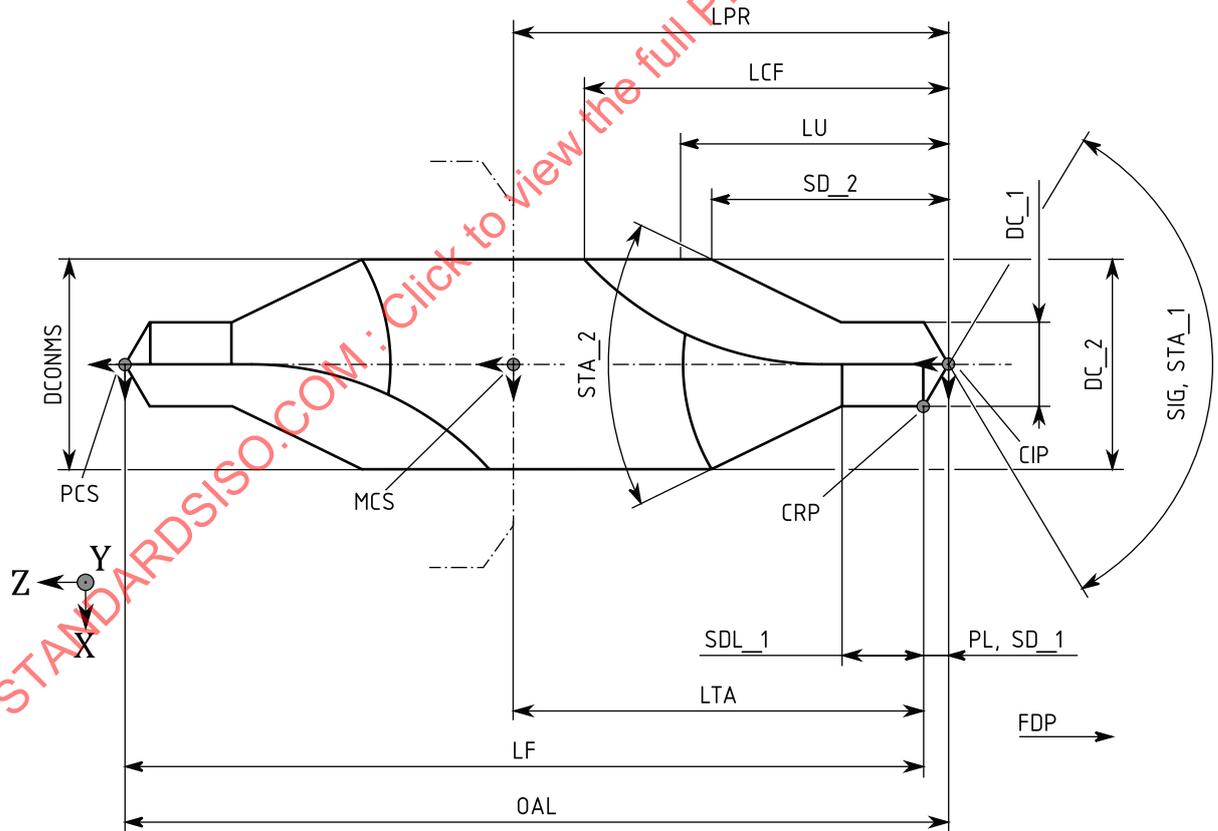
ISYC 302-07 - Centre drill, type A, solid
